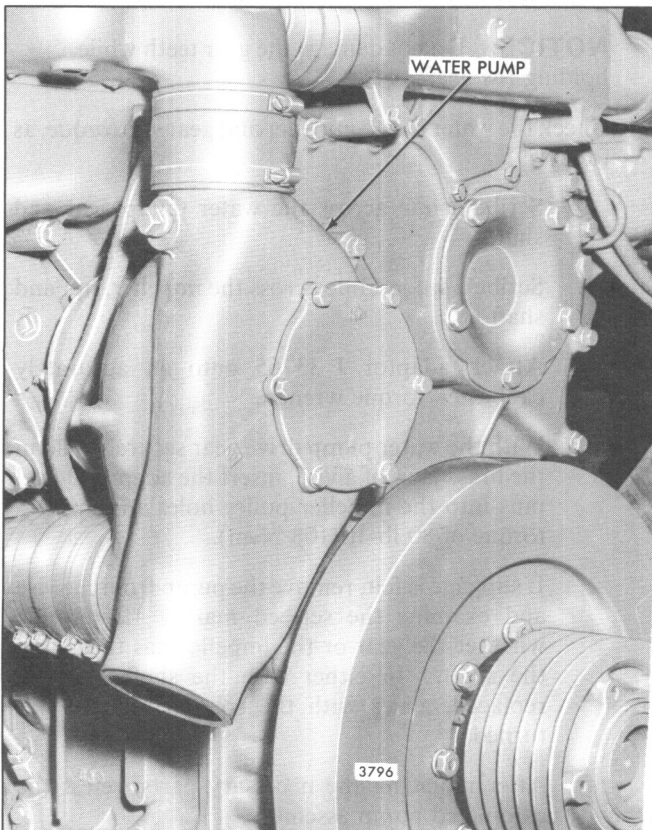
Water Pump Mounting (12V-92 and 16V-92 Engine)
